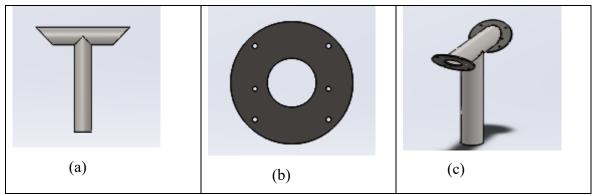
3D-CAD model of (a) tubular joint (b) UR 10 robot mounting point (c) Assembly of T-joint with UR 10mounting part.
